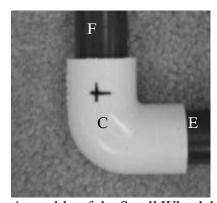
Assembly of the Small Wheelchair (Step 10).
